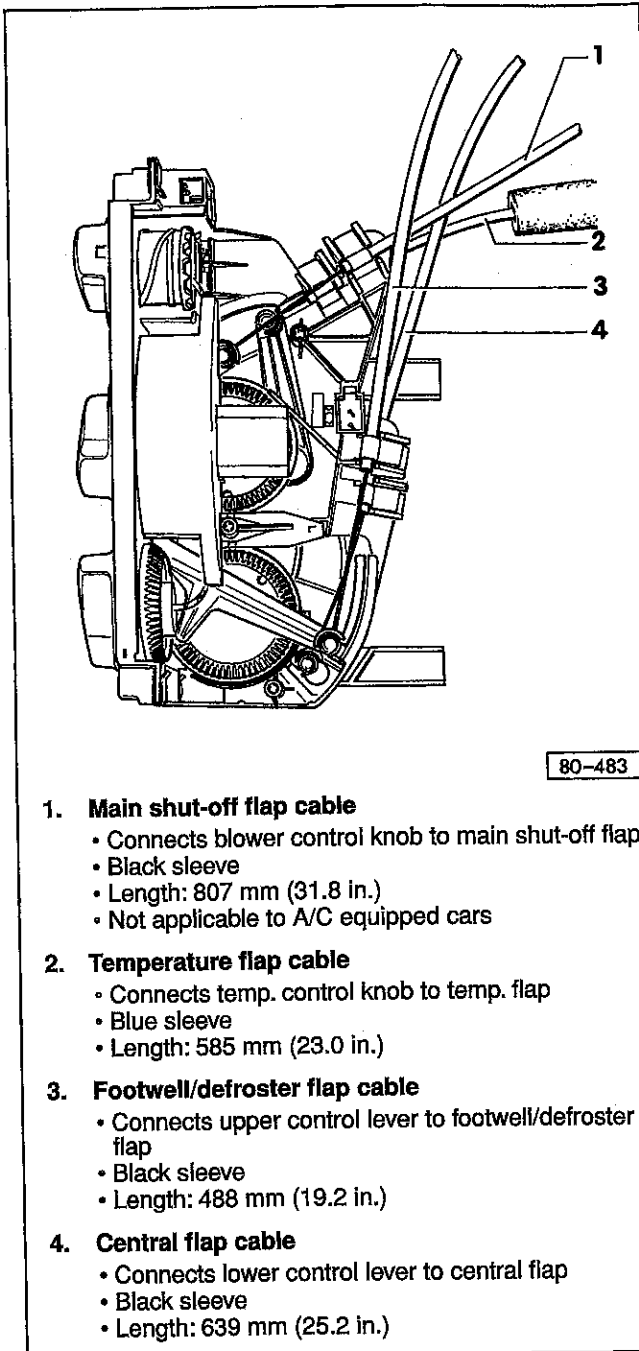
Exploded view of control cables on ventilation control head (control head shown for cars without A/C, others similar).
